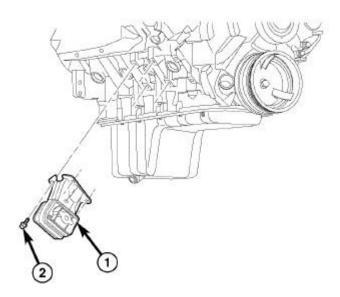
Removing/Installing Engine Mount Courtesy of CHRYSLER LLC
